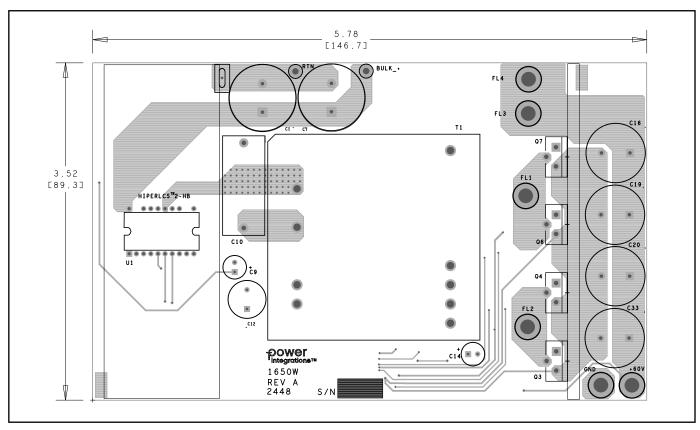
PCB Layout 1650 W / 60 V (Top View).
